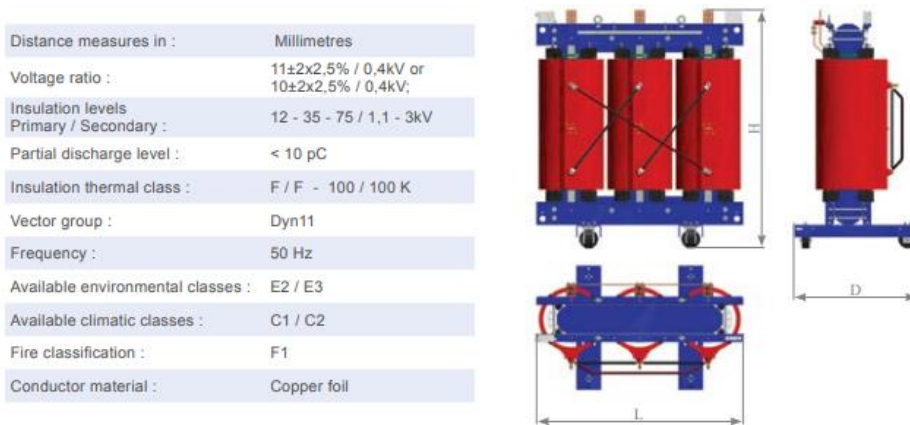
Dry type transformer, Cast Resin Transformers family
